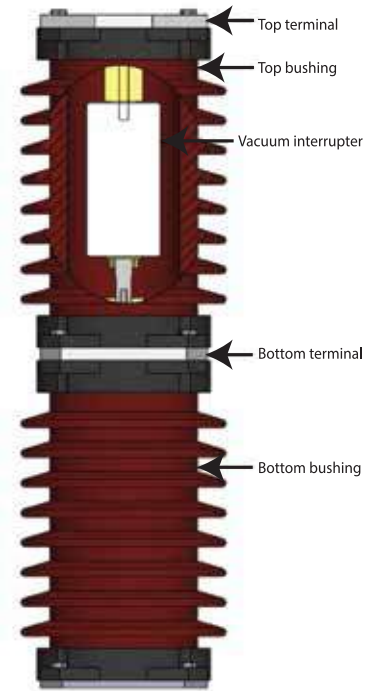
Broken out view of pole assembly of EOFVp-36 vacuum circuit breaker
